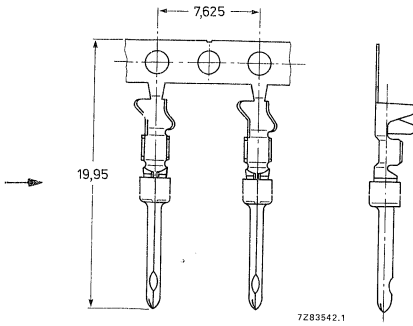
Crimp contact pins for AWG20 to AWG26 wires, on band.
